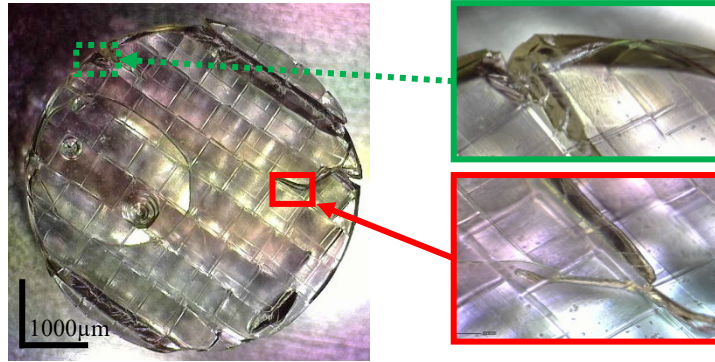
IP-PDMS resin printed cylinder with block stitching and removed from substrate using sonication with zoomed in defects caused/exacerbated by sonication.
